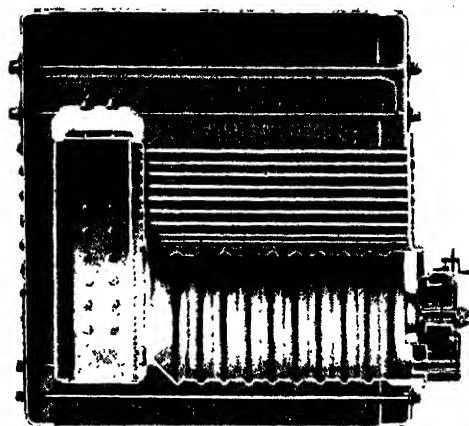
OIL-FIRED BOILER. Sectional illustration of a return-tube marine boiler.
